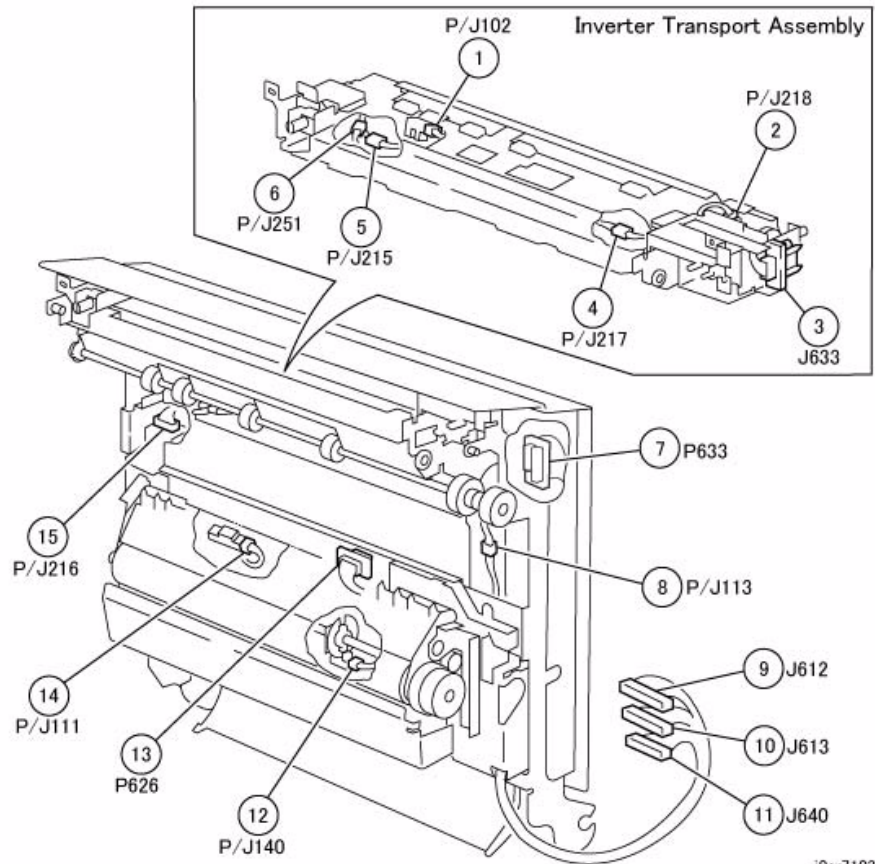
Left Cover Assembly, Inverter Transport Assembly (j0sr7103)
